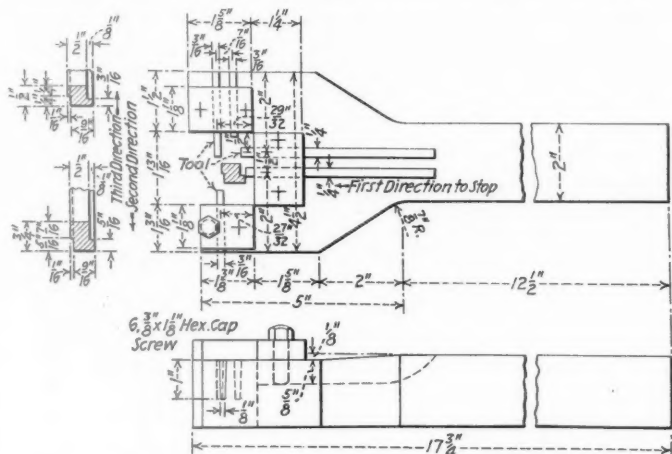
Detail of lathe tool for forming piston valve packing rings
